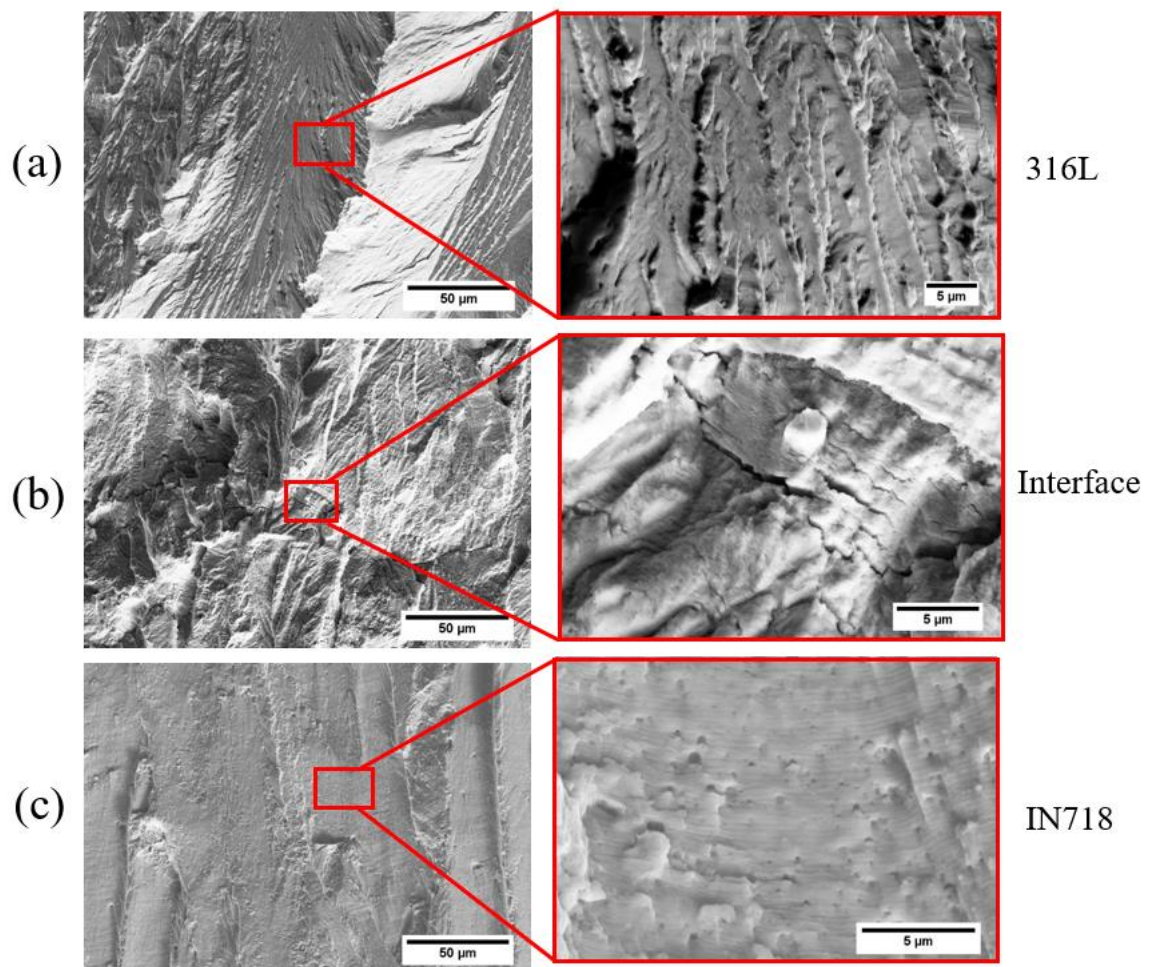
SEM view of specimen No.2 fracture surface, magnified view of a) 316L top layer, b) Interface, and c) IN718 bottom layer.
